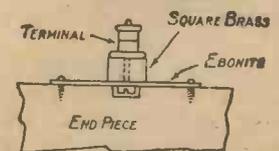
Method of Fixing Slider Rod to End Piece.
